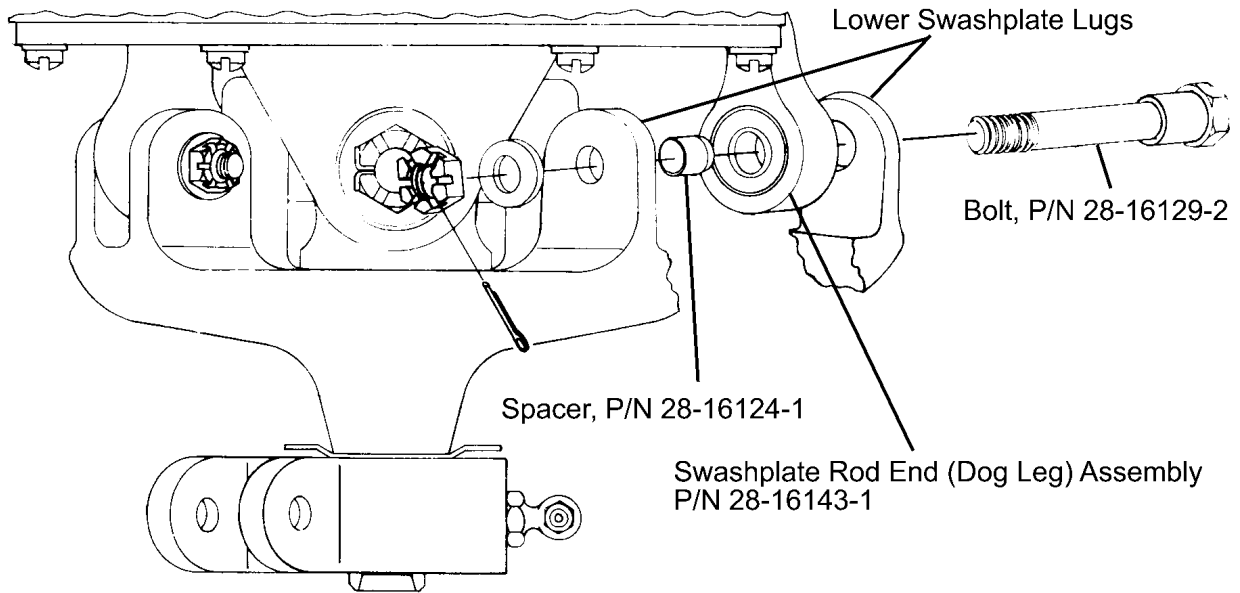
Swashplate Rod End (Dog Leg) Assembly Location
